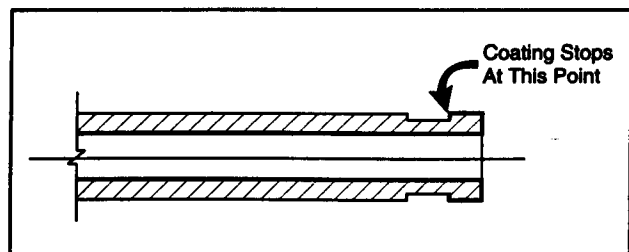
Coating Detail for Grooved Connection^(4.39)
